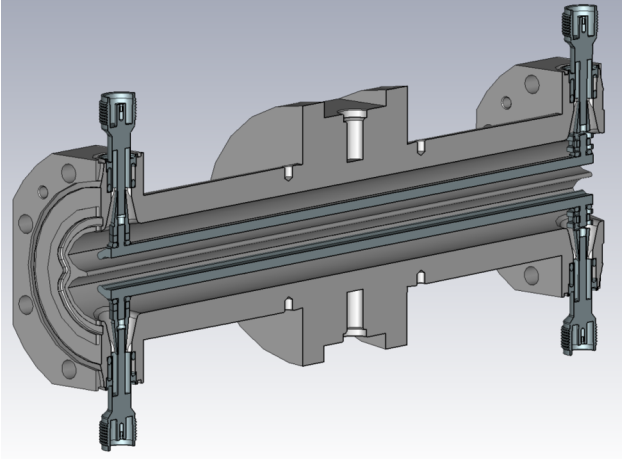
Mechanical design of the prototype PETRA IV stripline kicker.
